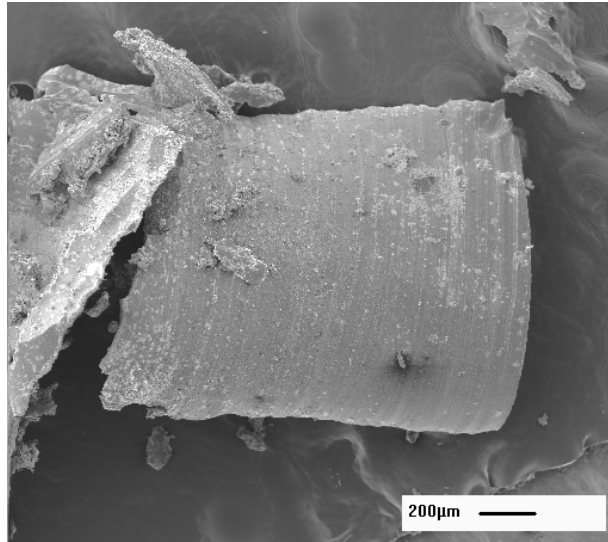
SFM chip machined by Tool 4 at 5500 rpm and 14.8 mm/s feed speed.
